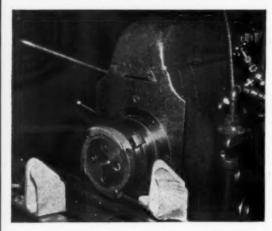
Milling operation on the ST-14 components shown in the foreground, details and dimensions of which are given in Fig. 8.
